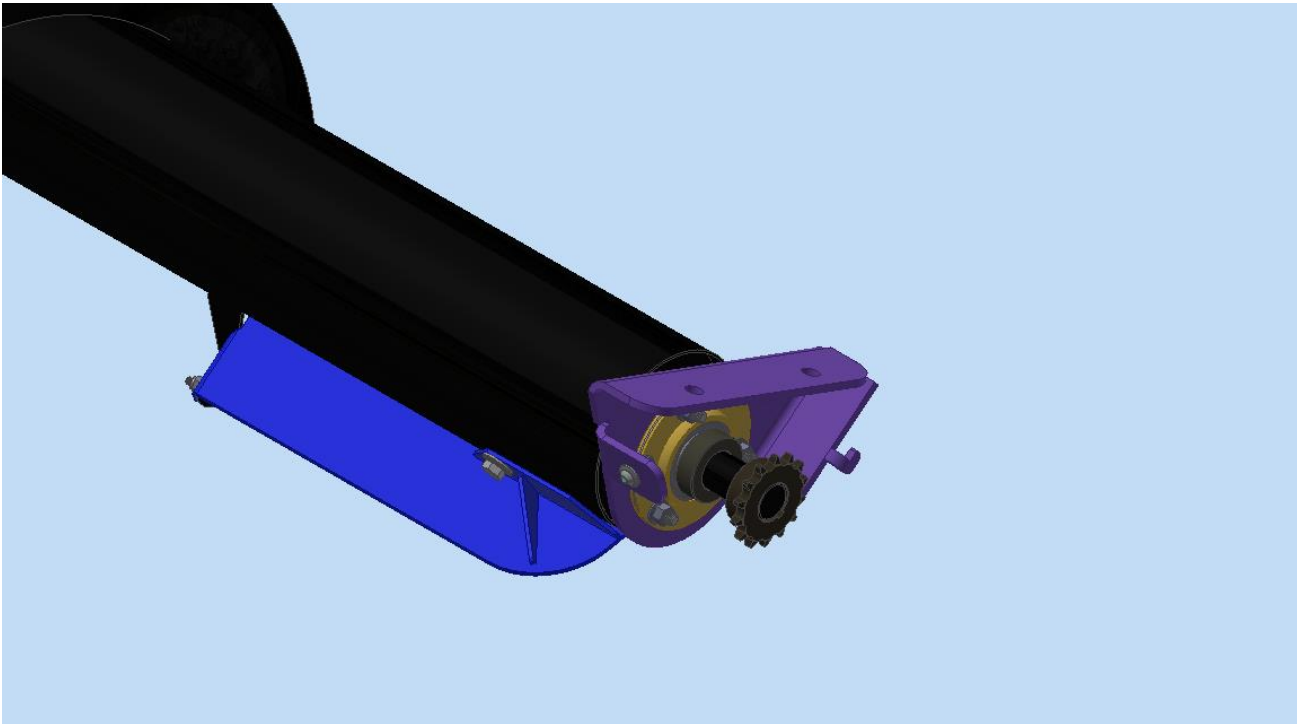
RH AUGER WITH BEARING MOUNT, SPROCKET AND PADDLE
